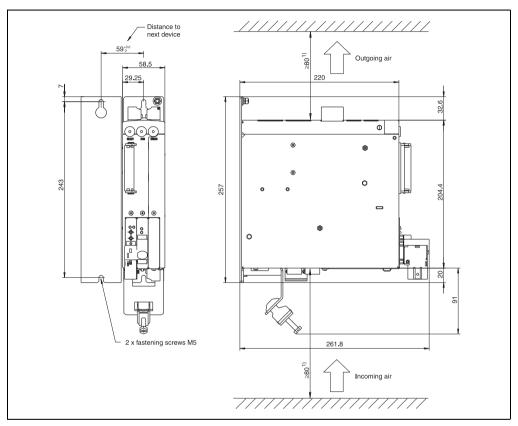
Dimensional diagram and installation dimensions for ACOPOS 1010, 1016
